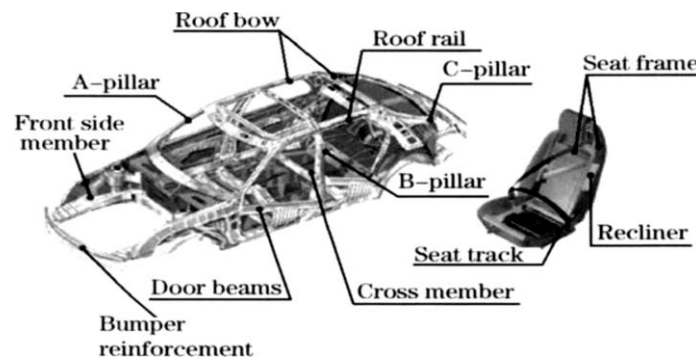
The automobile parts in which DP 600 steel is used [3].
